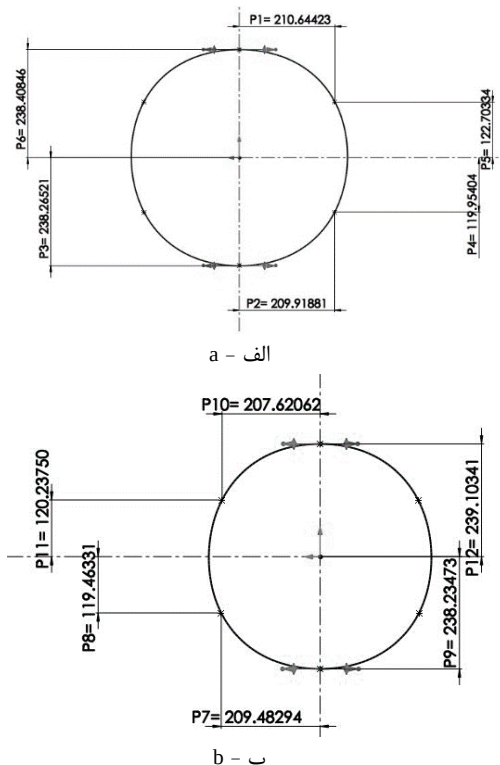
(a) Cross section 1 (b) Cross section 2 (dimensions in mm)
